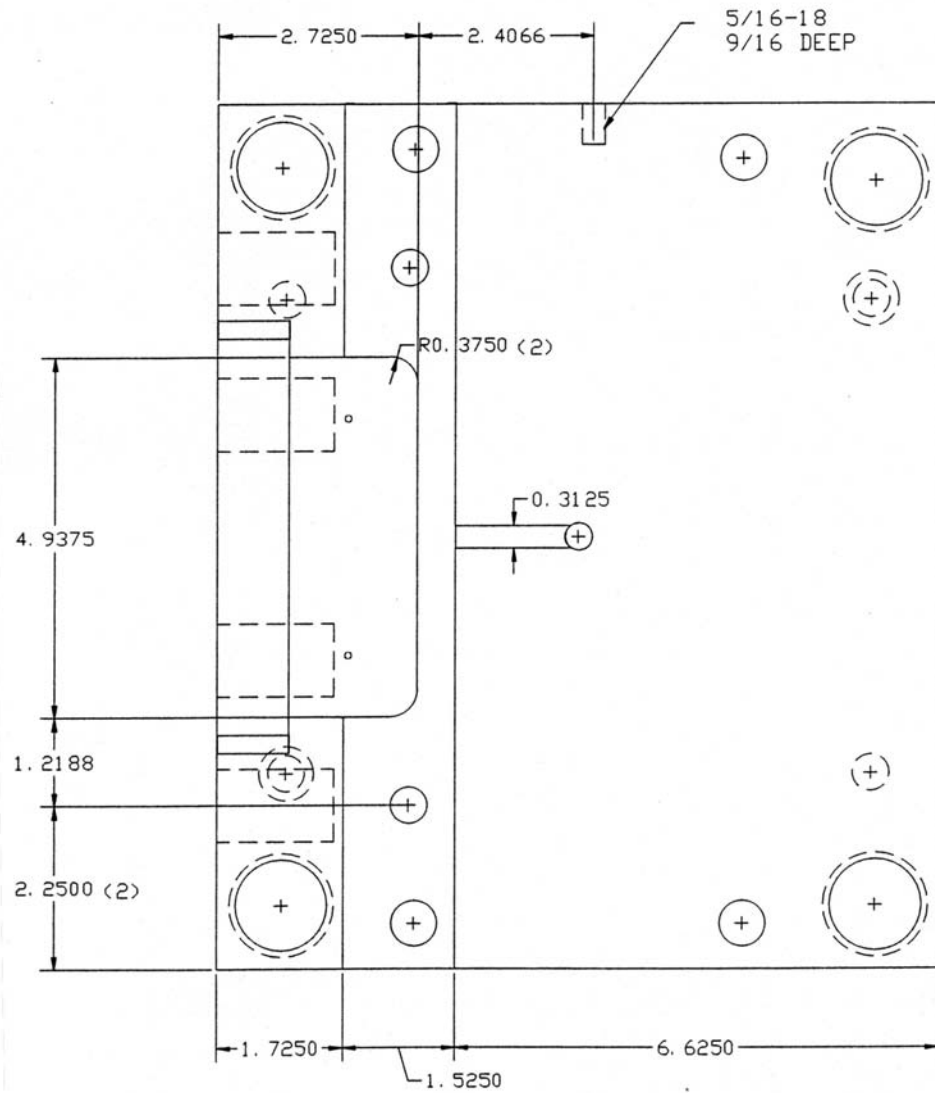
Side view of the B plate from the nozzle direction. All dimensions are in inches.
